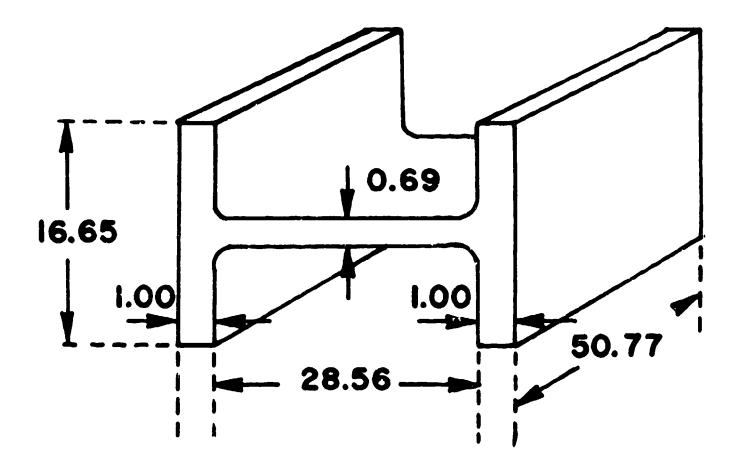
Schematic drawing of I-beam showing dimensions in centimeters.
